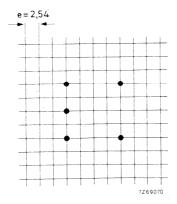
Hole pattern for mounting on a printed-wiring board, hole dia $1,3+0,1~\mathrm{mm}$
